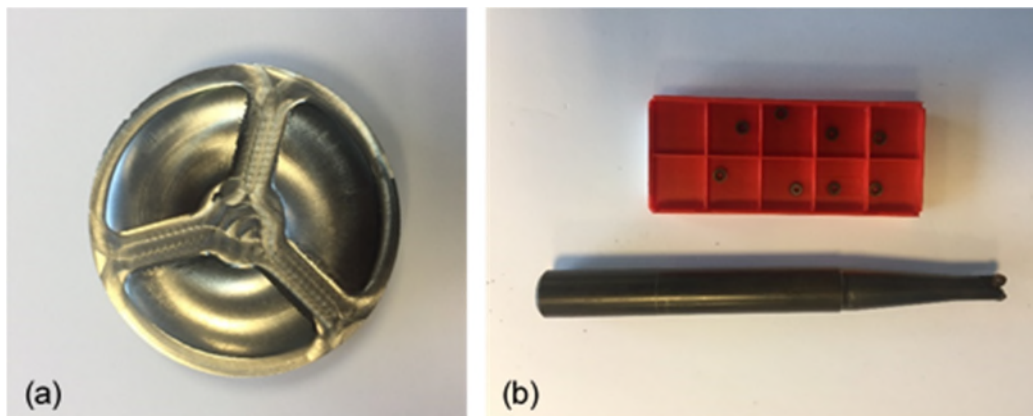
(a) Milled specimen of Ti-48Al-2Nb-0.7Cr-0.3 Si, and (b) cutting tool used to perform the preliminary tests.
